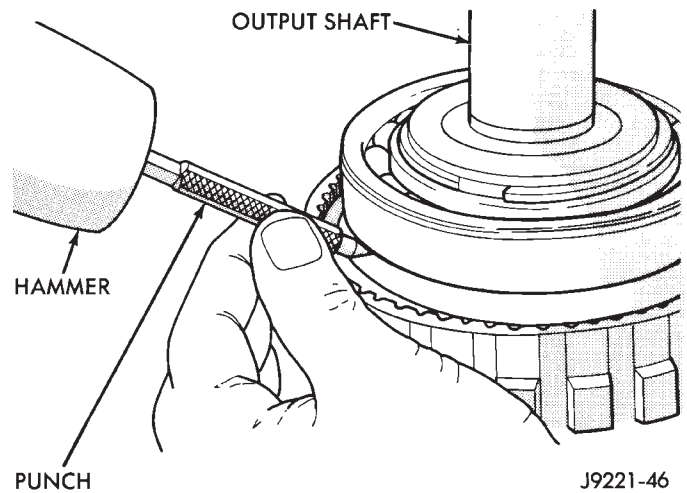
Marking Annulus Gear And Output Shaft For Assembly Alignment
